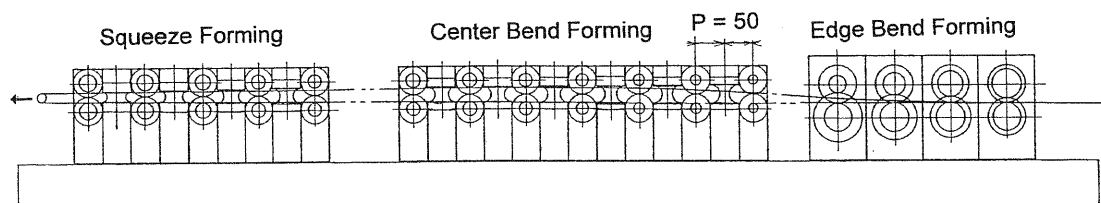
Schematic illustration of roll arrangement for squeeze forming method
